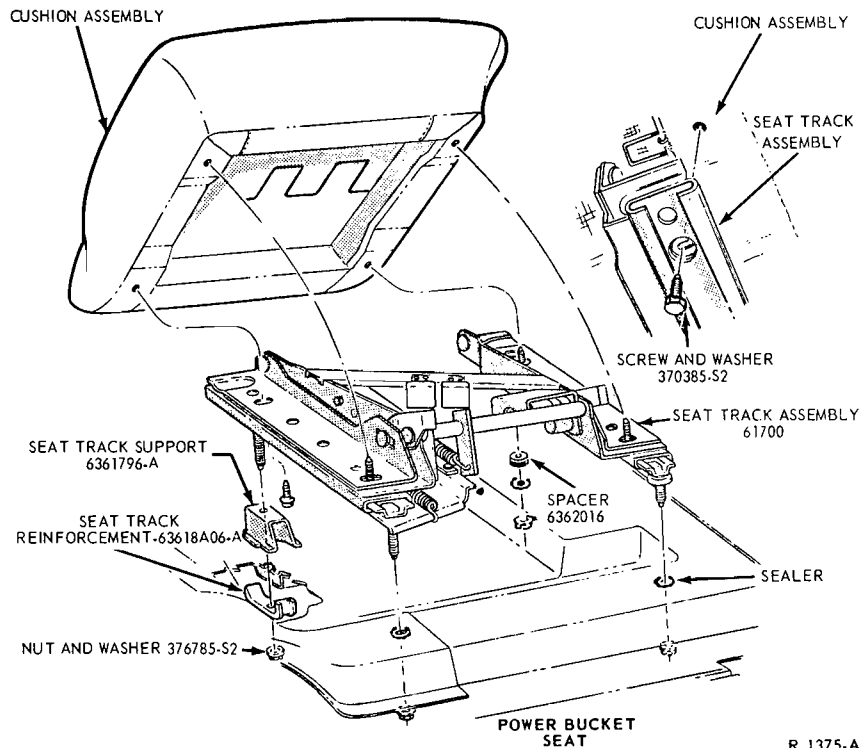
Power Seat Track—Bucket—Mercury Intermediate
